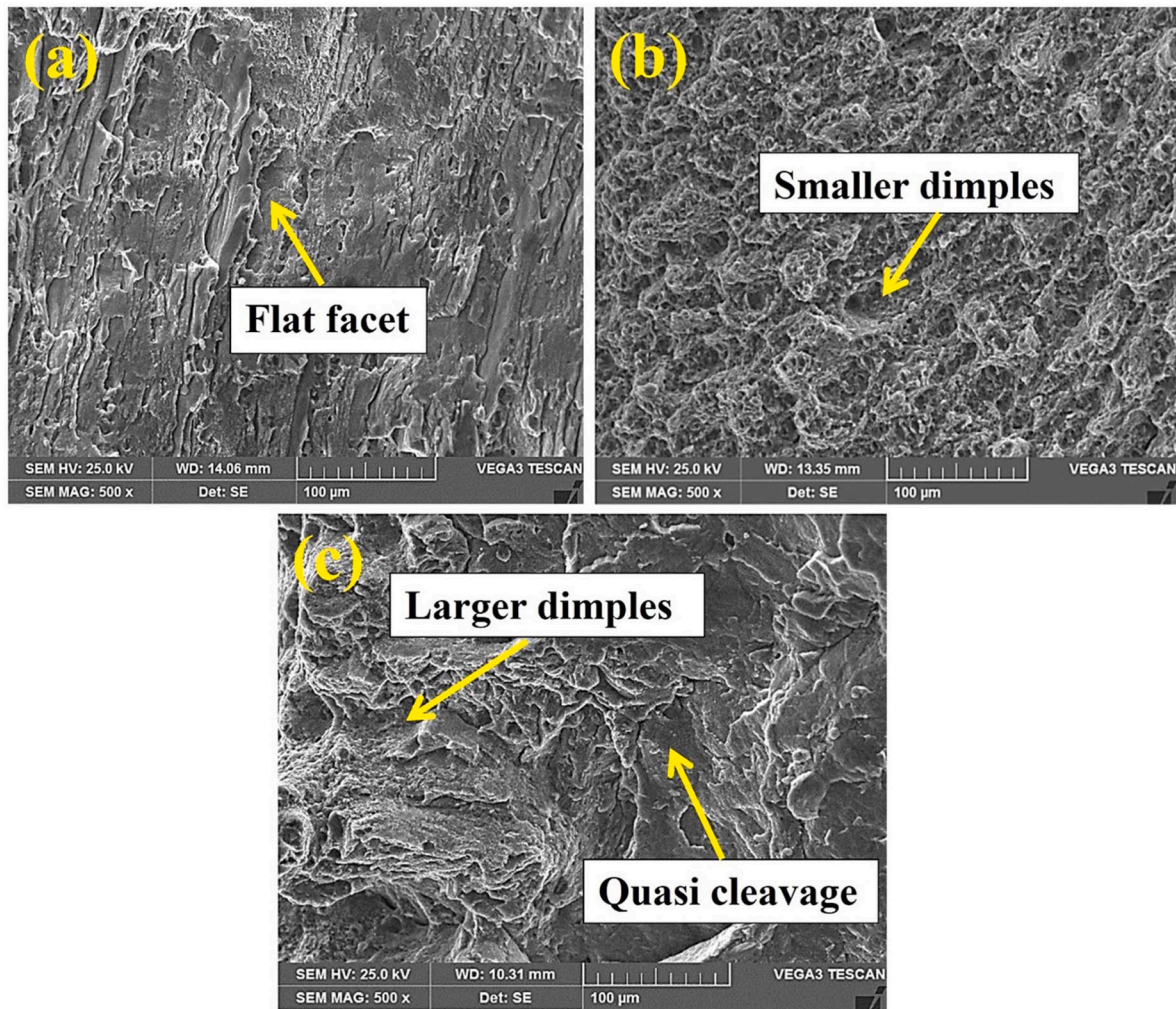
SEM photomicrograph of fractured surface of (a) AA7075/GNPs, (b) SQ tool, and (c) CT tool joints.
